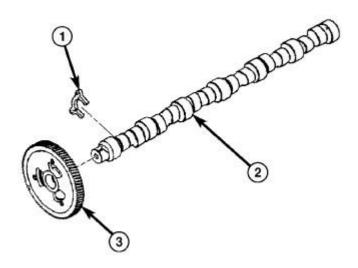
Camshaft, Gear & Thrust Plate Courtesy of CHRYSLER GROUP, LLC
